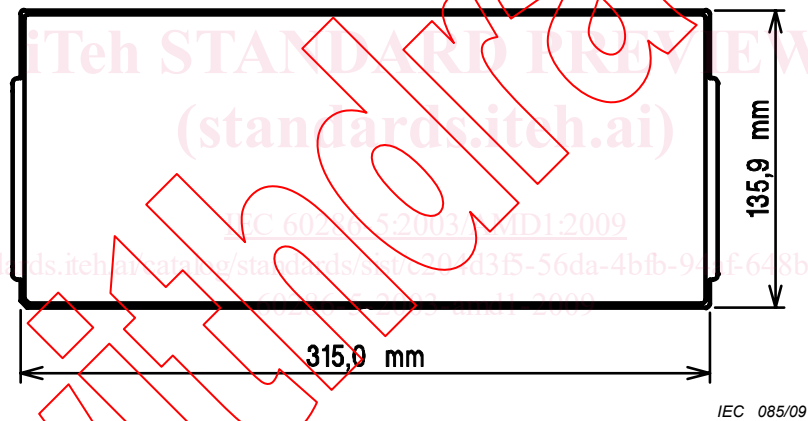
Dimensions 315,0 mm and 135,9 mm
